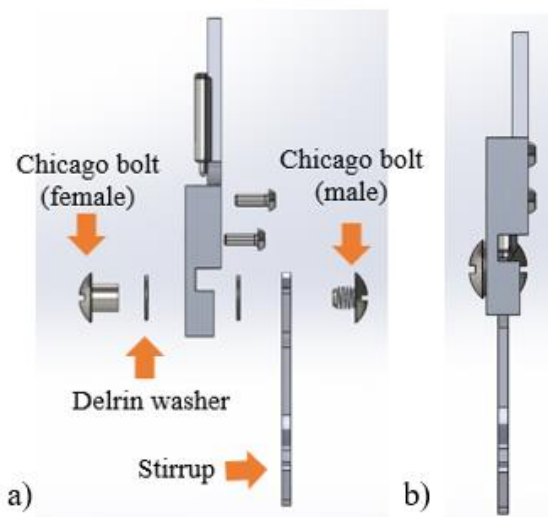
Stirrup attachment to joint body using Chicago bolt and washers; side, exploded view (a) and assembled view (b).
